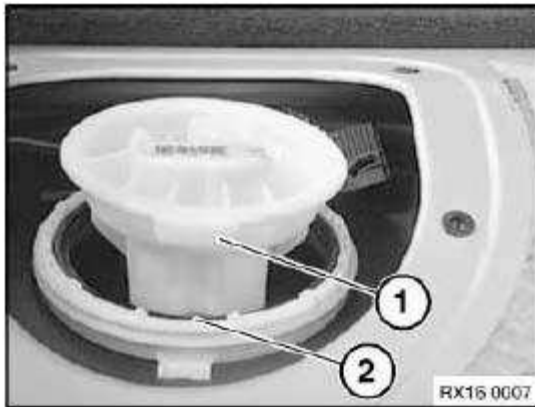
Fuel Level Sensor Lug And Tank Recess
